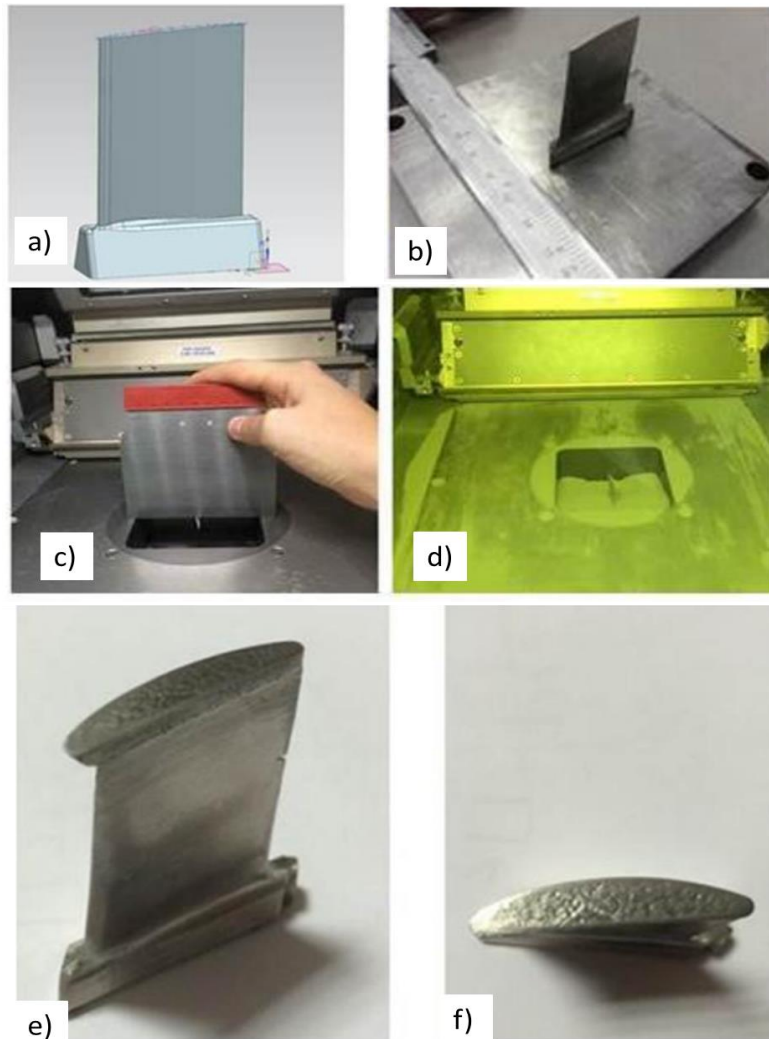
Gas turbine engine blade repair by selective laser melting. a) model of damaged blade b) welding part to build plate c) lowering blade into powder bed d) pre-filling powder bed with powder e) and f) repaired parts [27]
